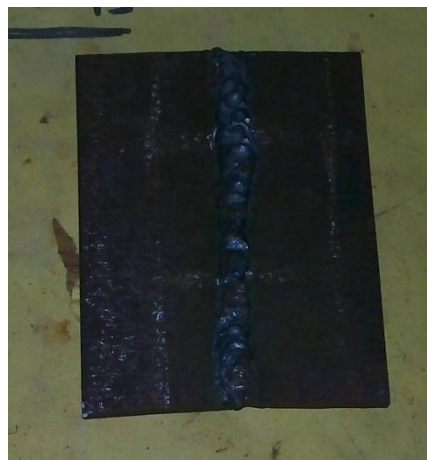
Welded Sample of Low Carbon Steel ASTM A29
